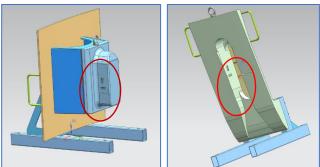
Drawing of key mock-up (left) and groove mock-up (right) with artificial defects (red oval)
